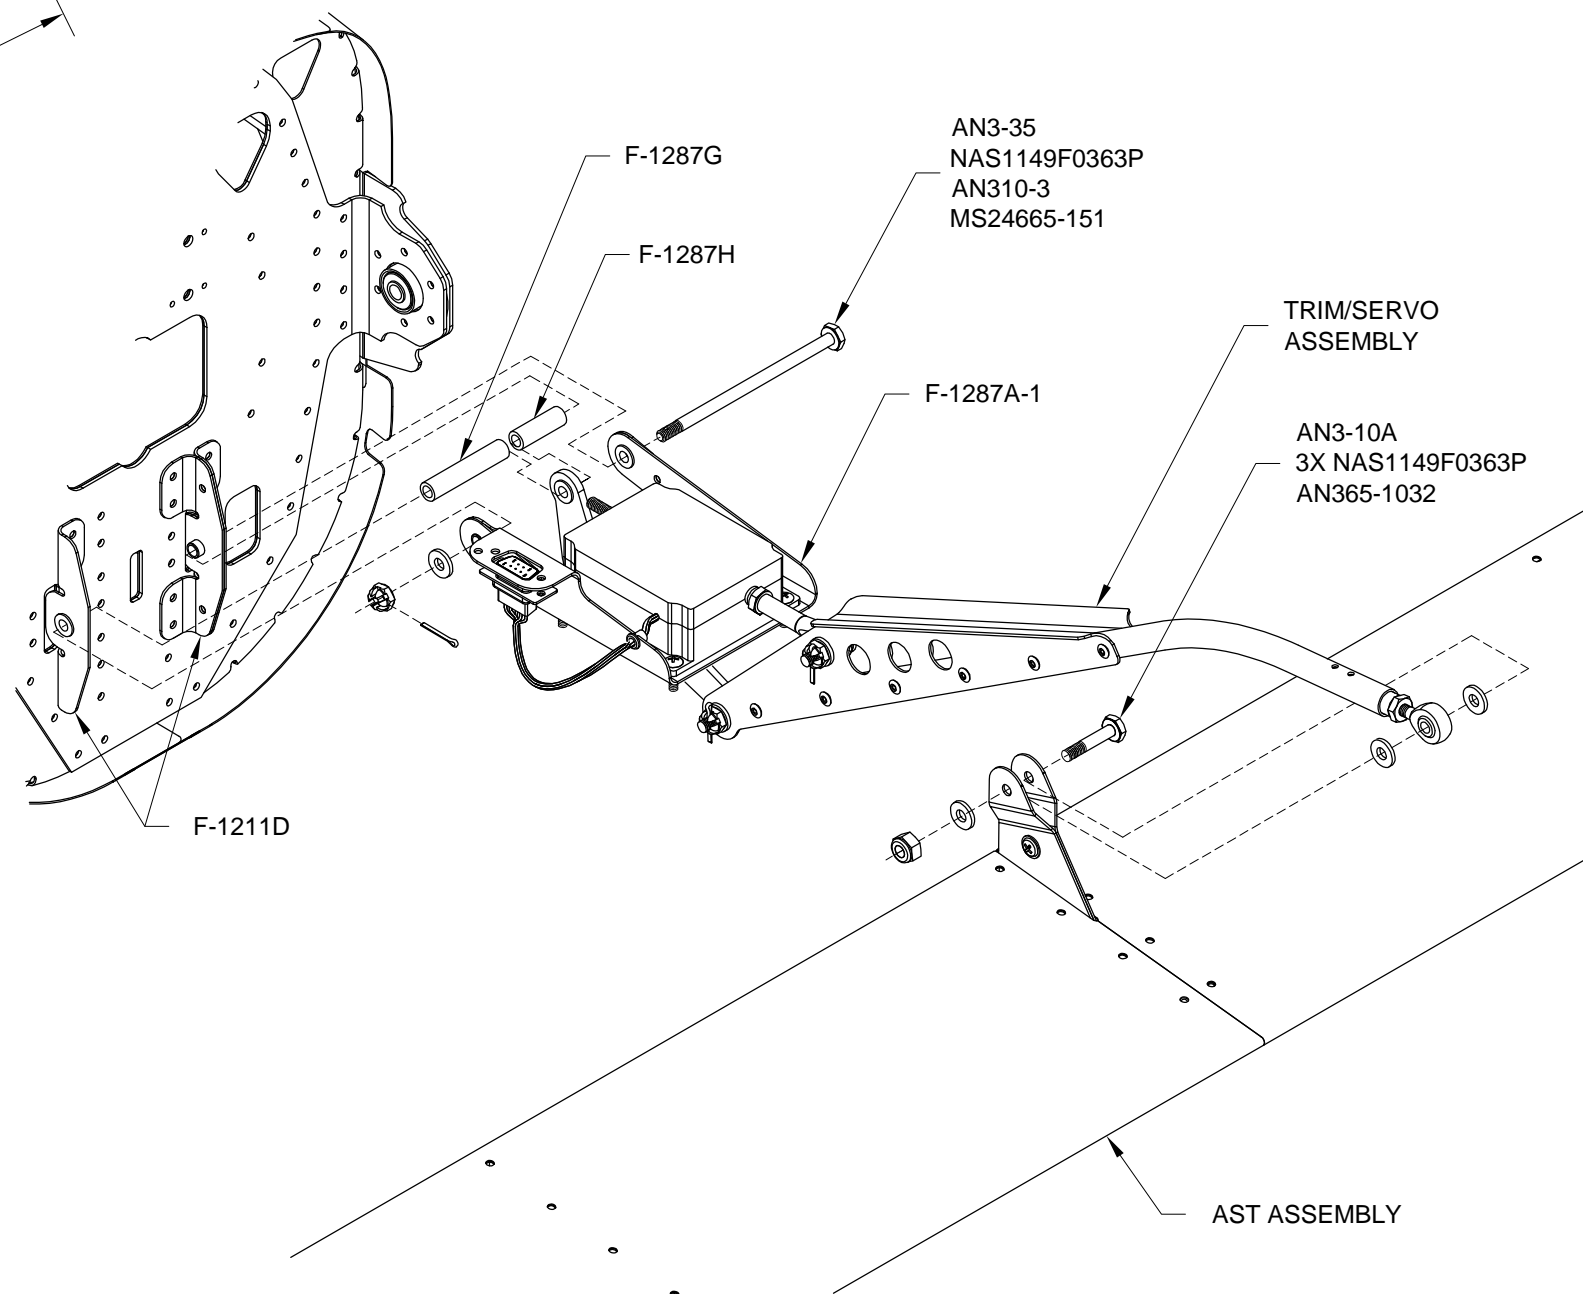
TRIM/SERVO ASSEMBLY INSTALLATION
